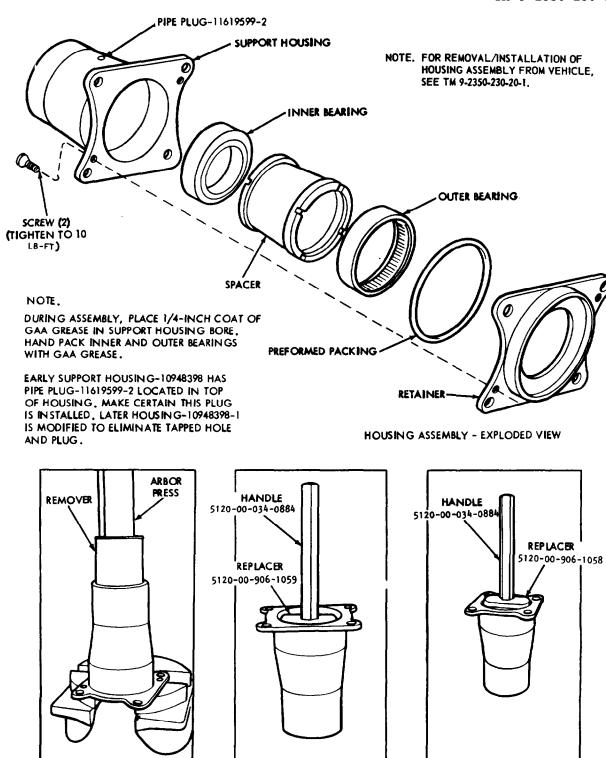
Disassembly/assembly - roadwheel arm support housing - positions 1, 4, and 5.
